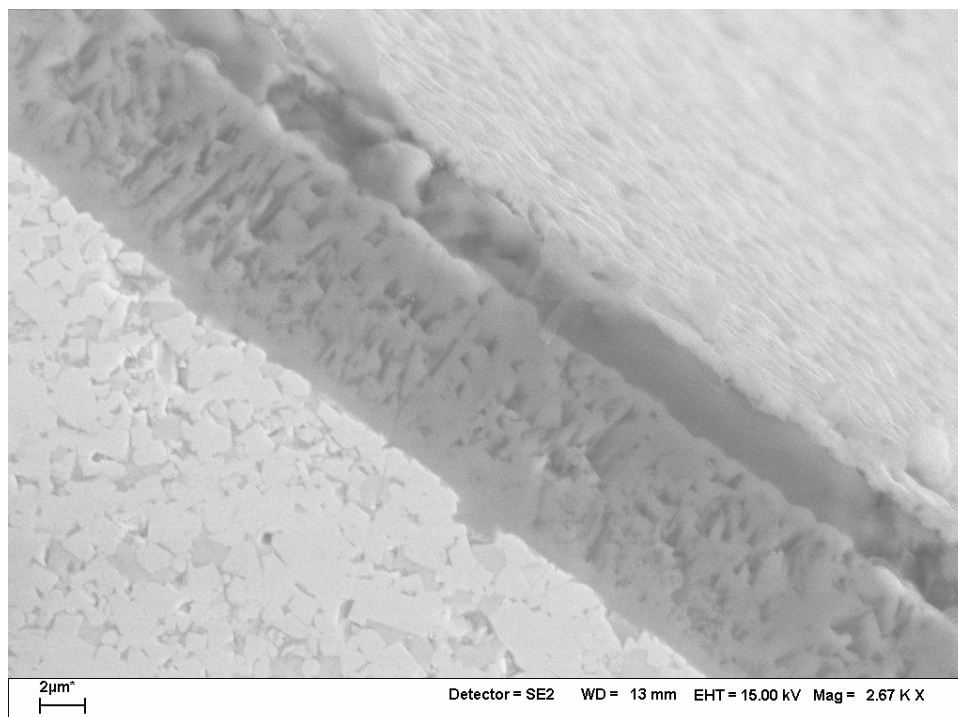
Porosity in the coating of the cutting tool insert from supplier 2
